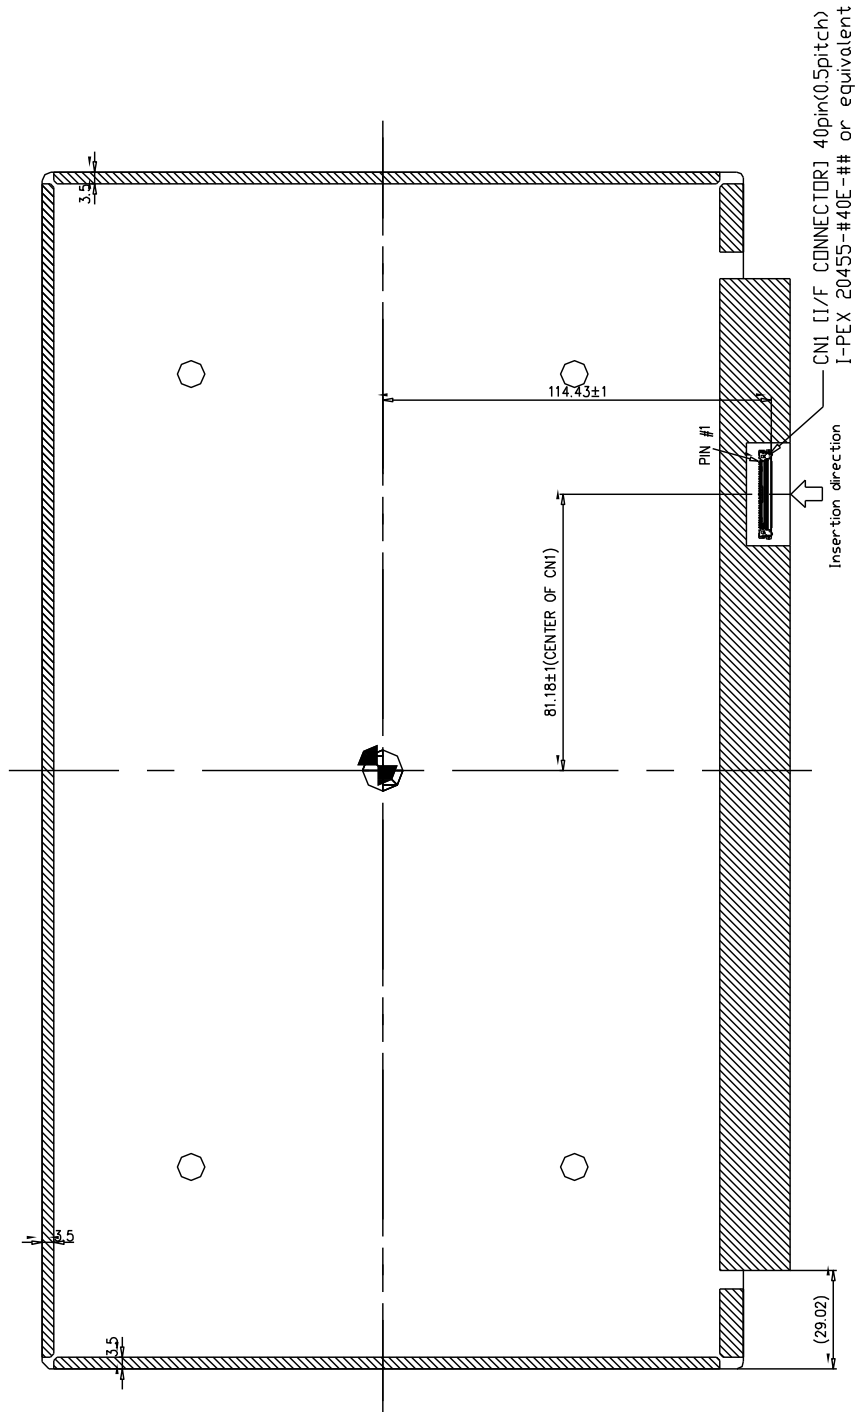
TFT-LCD Module Outline Dimensions (Rear view)
